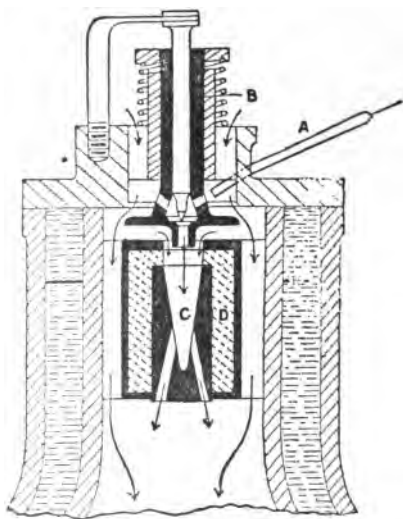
Section through Vaporiser and Combustion Chamber of Tolch and Co.'s Capitaine Engine.
